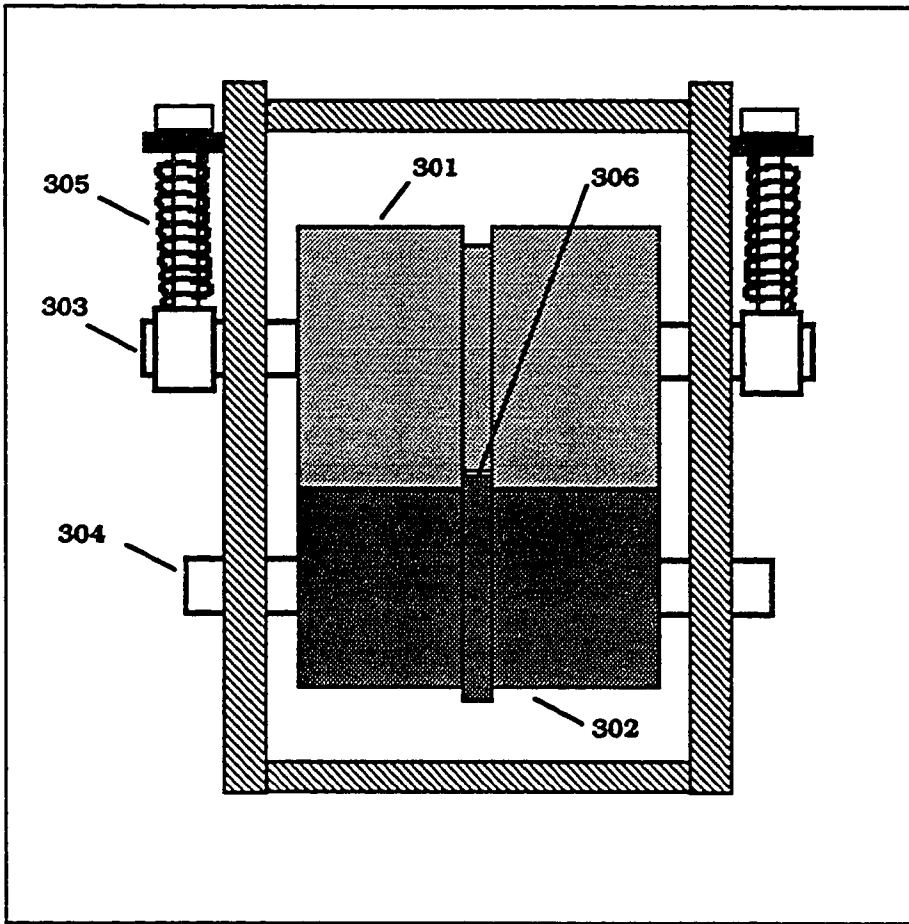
Front View Illustration of the Nip Roller Assembly
